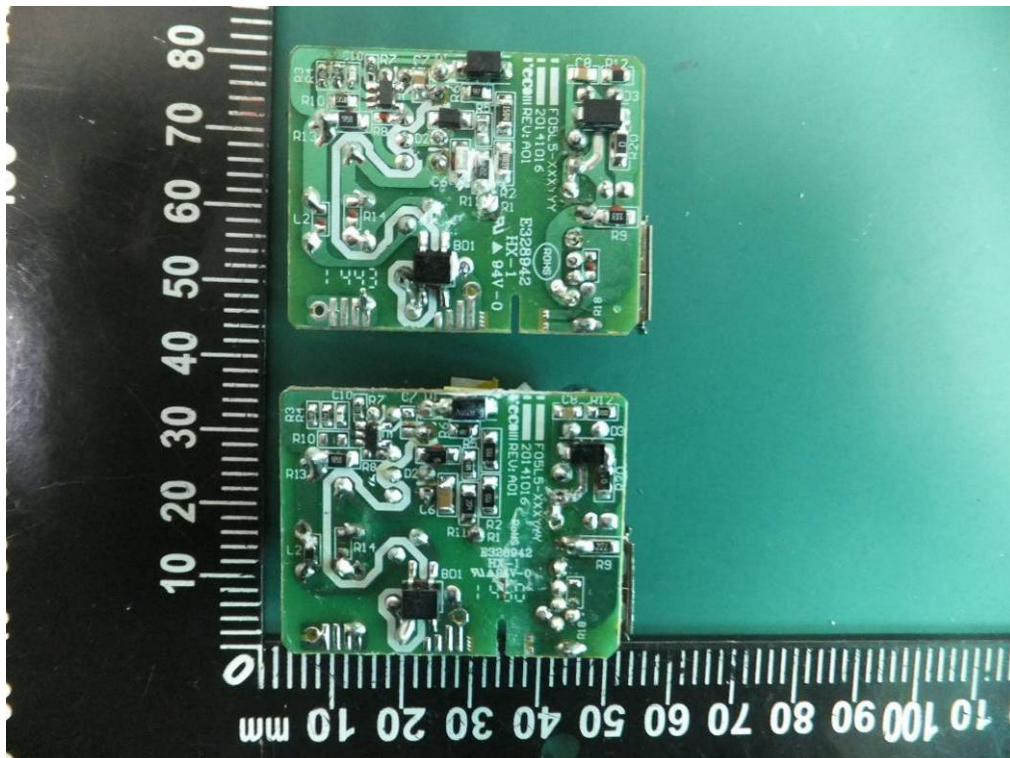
Bottom view of PCB for F05L5-xxxxyySPAU-U
